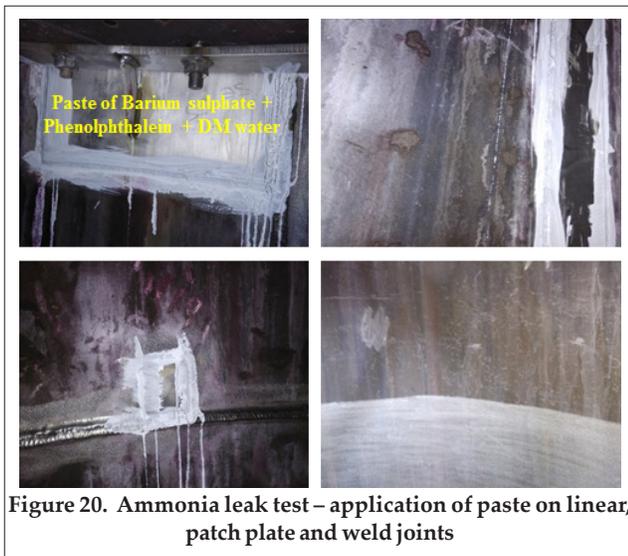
Ammonia leak test – application of paste on linear, patch plate and weld joints
